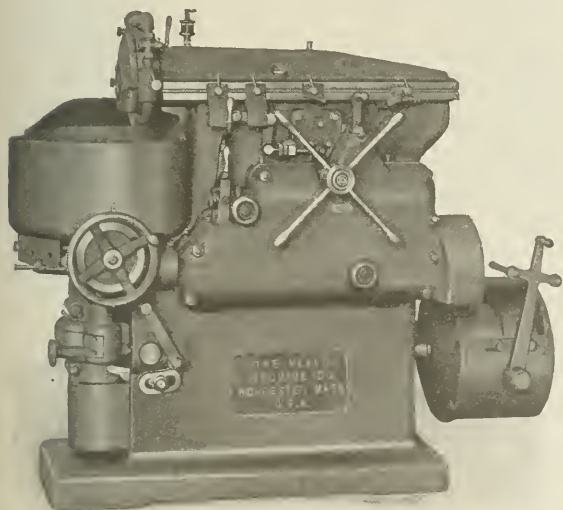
Heald 12-inch Rotary Surface Grinding Machine
